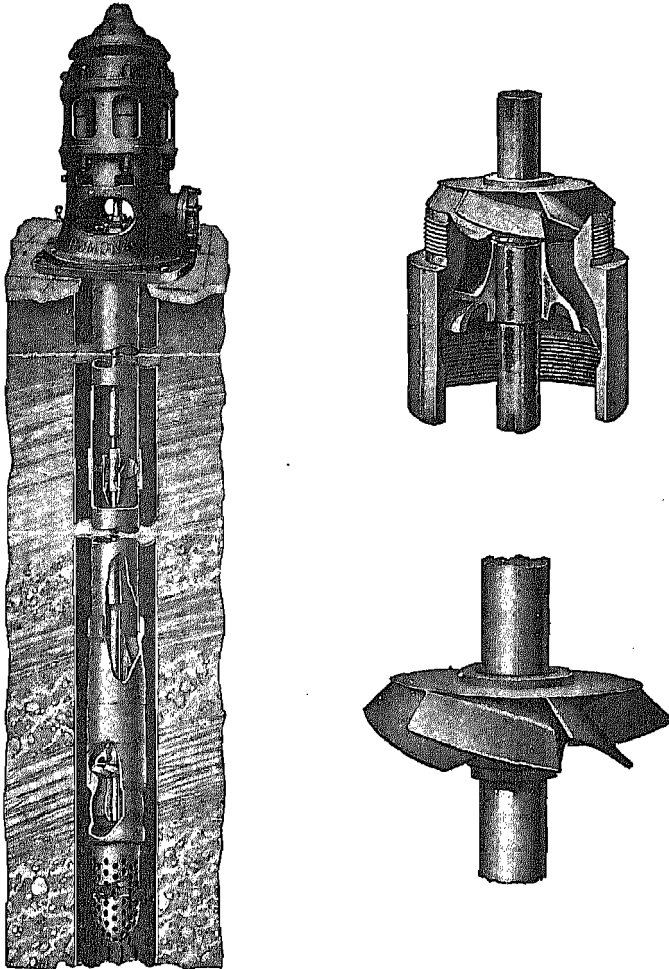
Cutaway section of Pomona turbine pump and motor and details of bowl and impeller keyed to shaft. (Courtesy Pomona Pump Company.)
